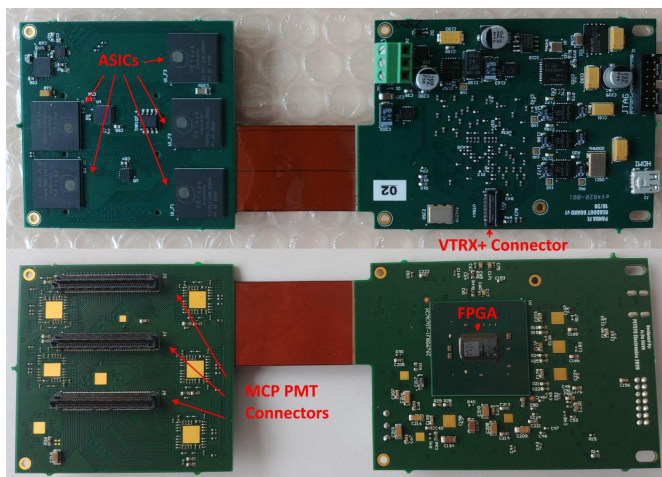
Custom PCB (Printed Circuit Board) for the readout at the GCS.
